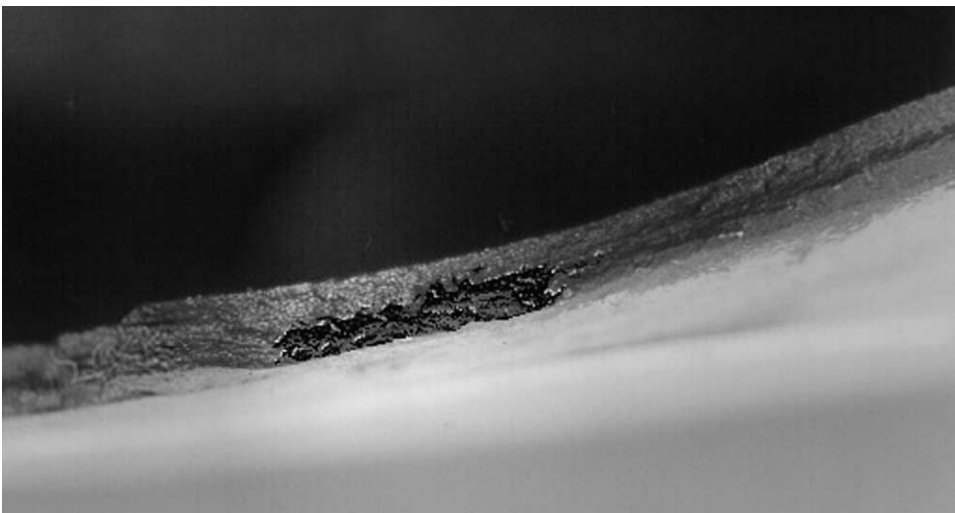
Fractographic section of failure origin showing black films.
